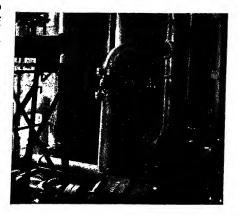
Welded lead piping handles corrosive chemicals.
